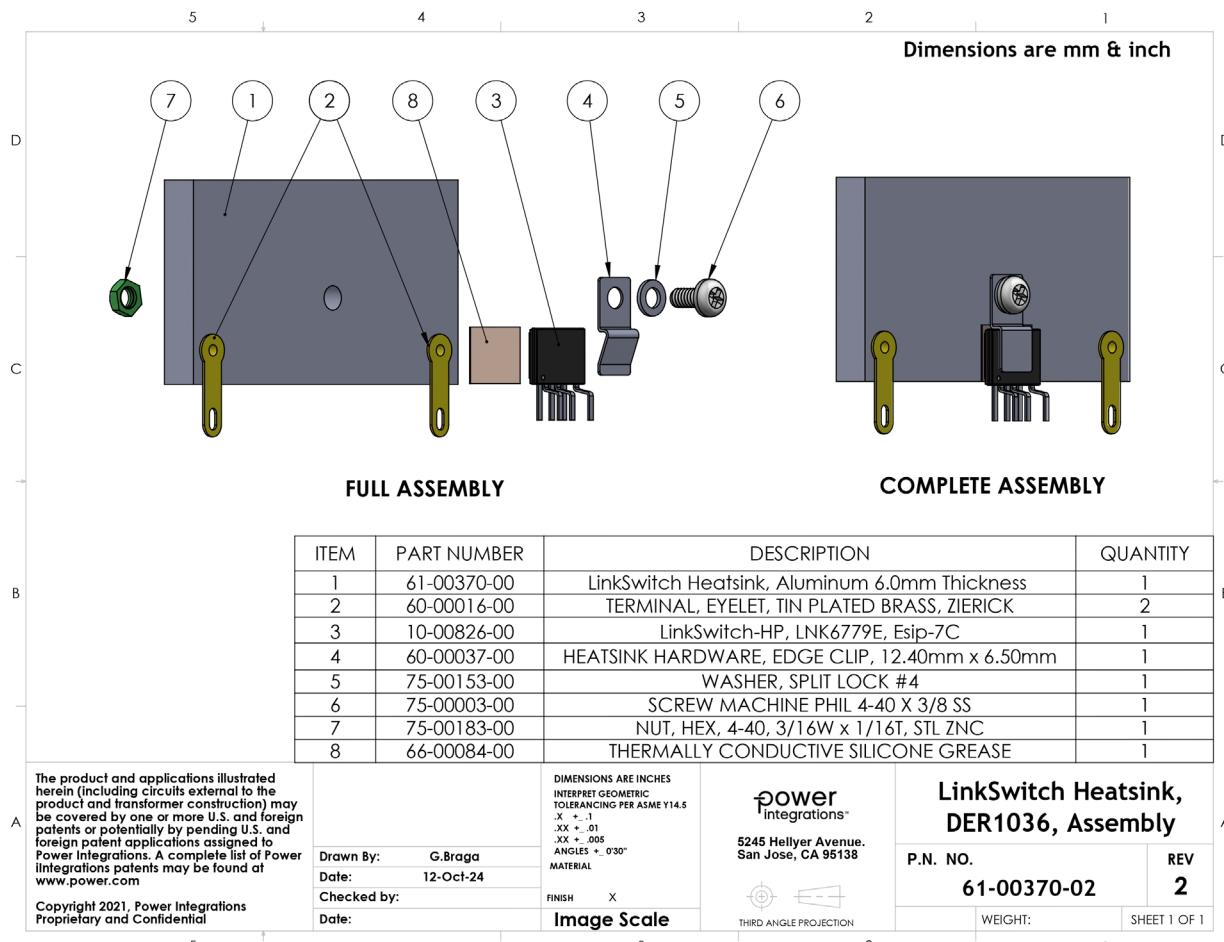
DER-1036 LinkSwitch-HP Heat Sink Metal Drawing.
